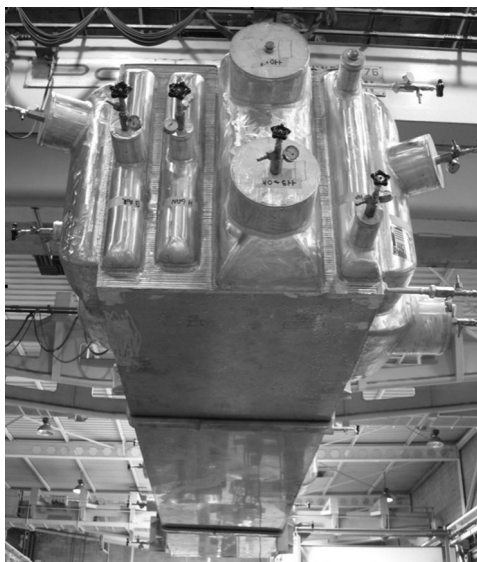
Brazed aluminum plate-fin heat exchanger. (Courtesy of Fives Cryo, Golbey, France.)
